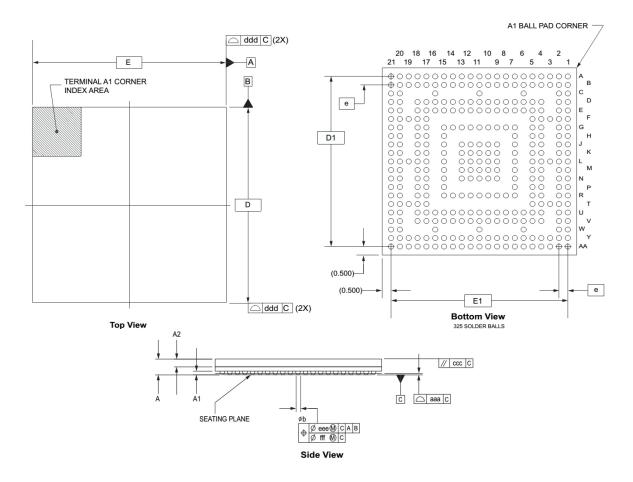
TMC8670-BI package outline drawing (dimensions are in millimeter)
